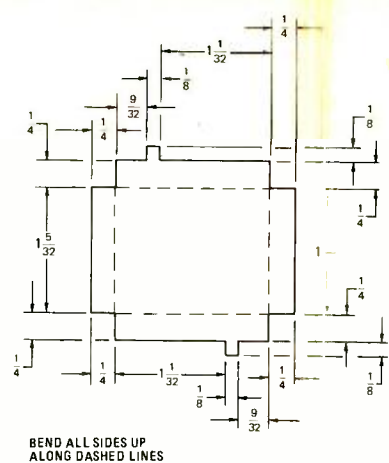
BOTTOM RF SHIELD is soldered to bottom of main PC board.
